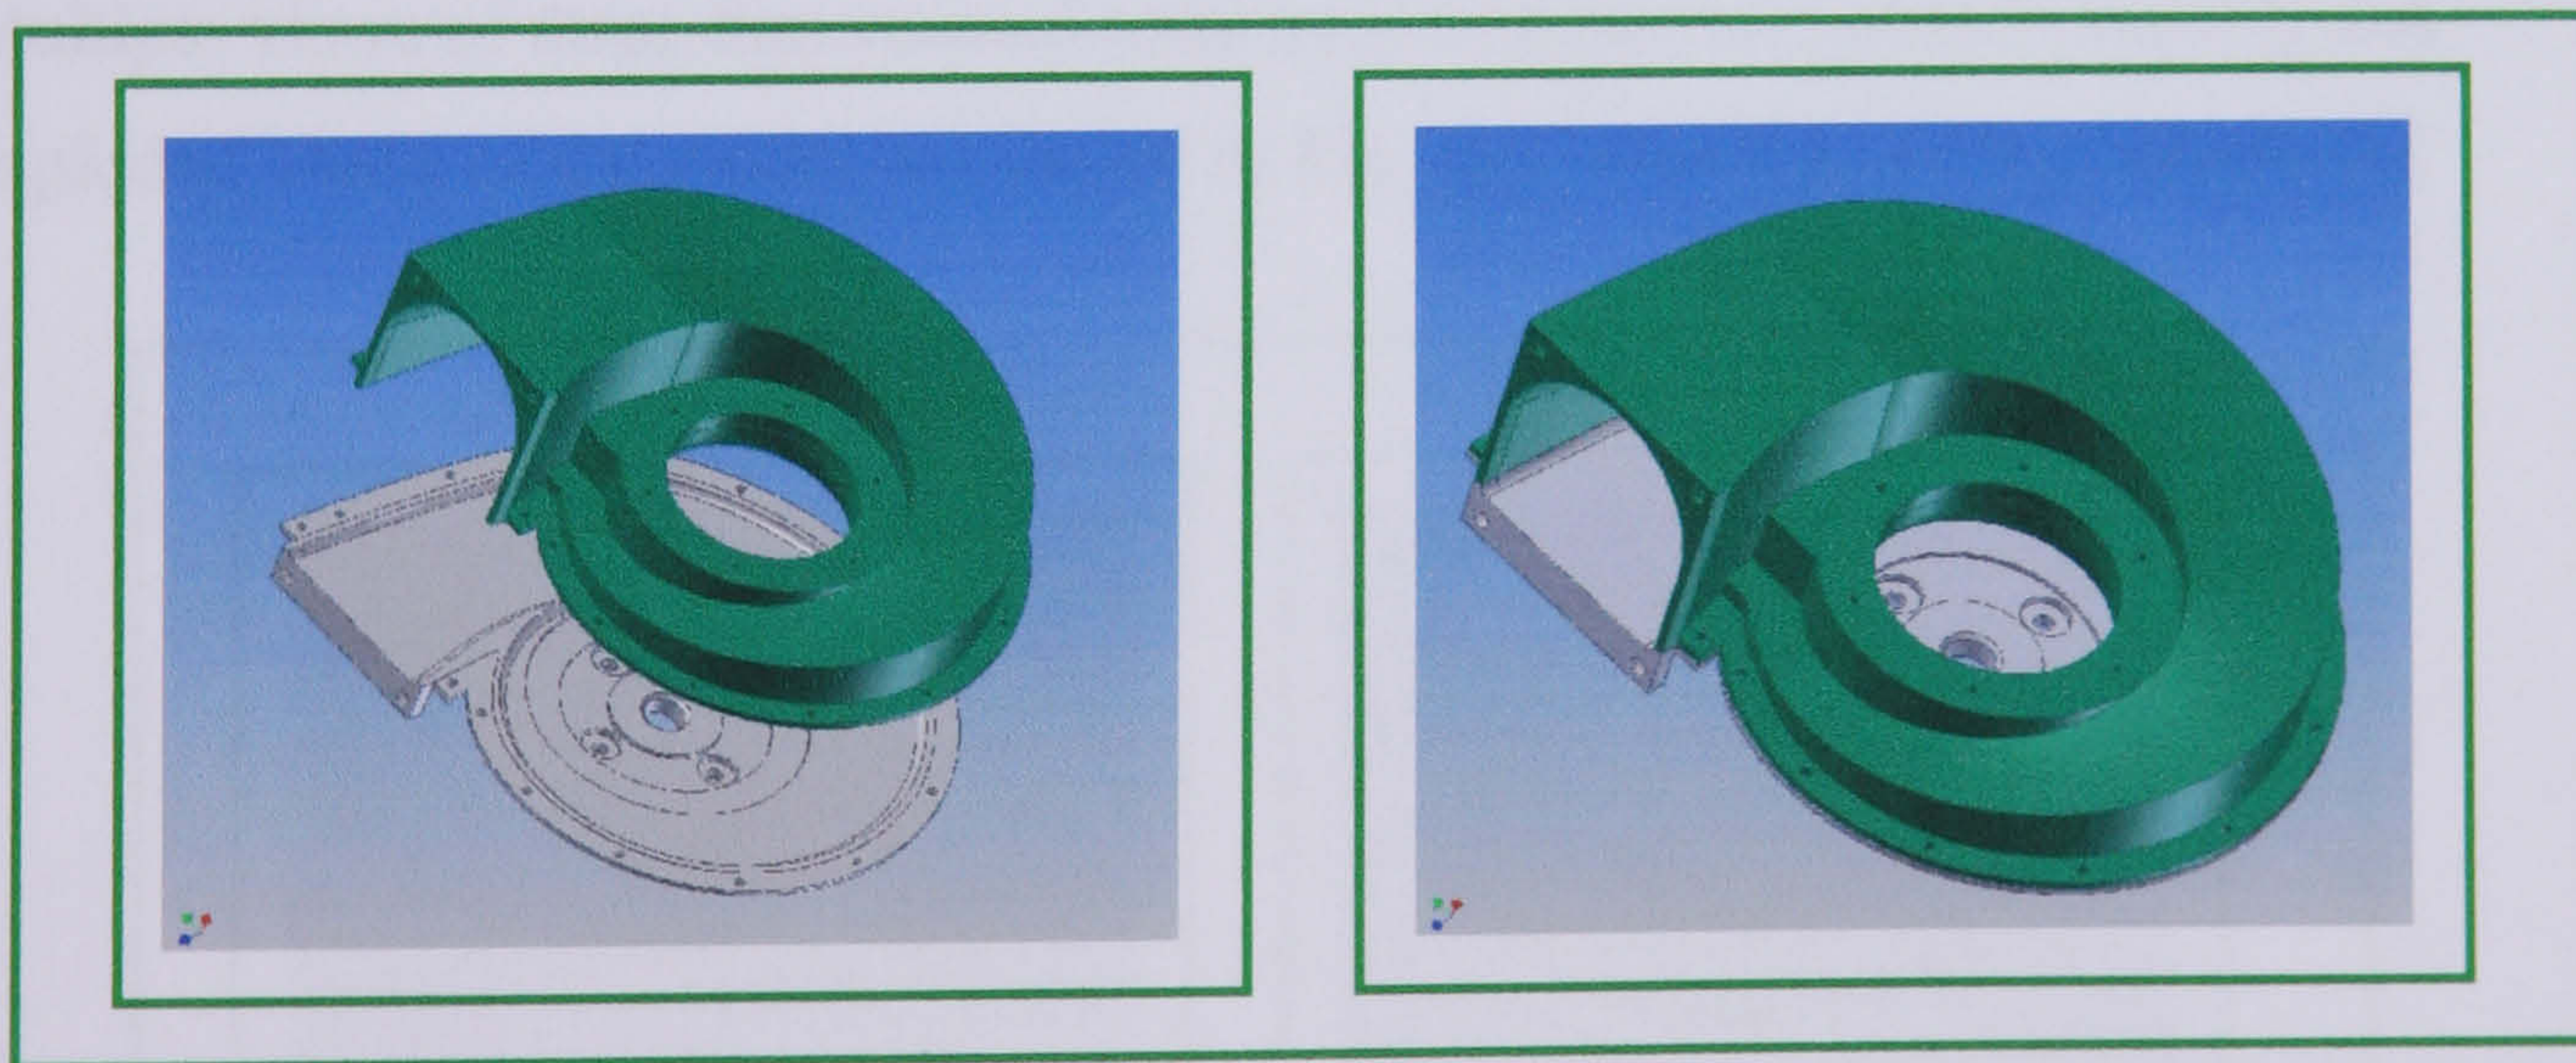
THREE-DIMENSIONAL SOLID MODEL ASSEMBLY OF THE NOZZLE-LESS VOLUTE CASING
